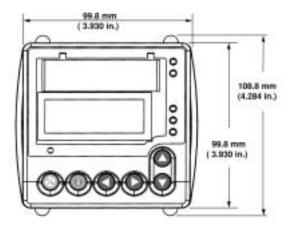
Front View Dimensions and Gasket Gap Dimension.
